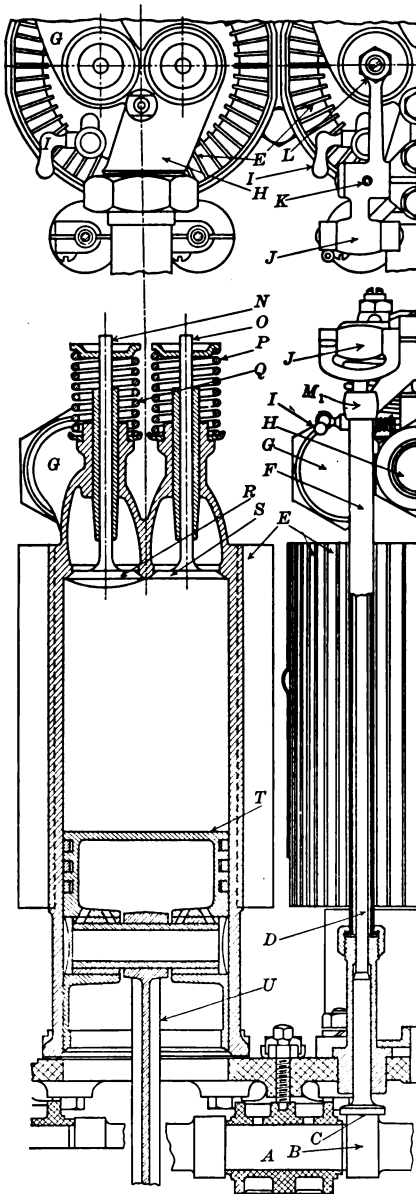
FRANKLIN AIR-COOLED ENGINE
